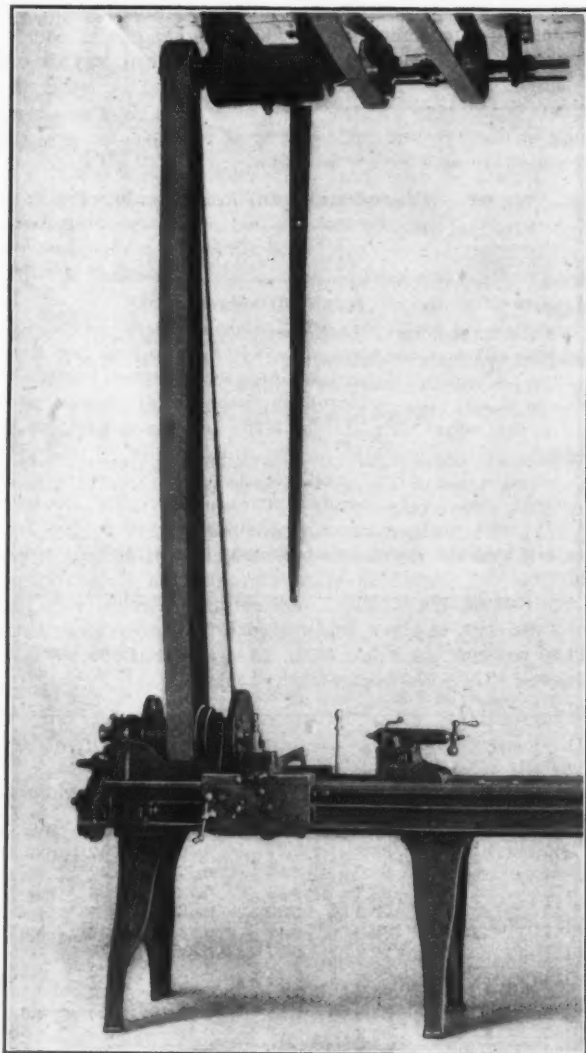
The Dill Drive as Applied in a Countershaft Connected to a Lathe.
